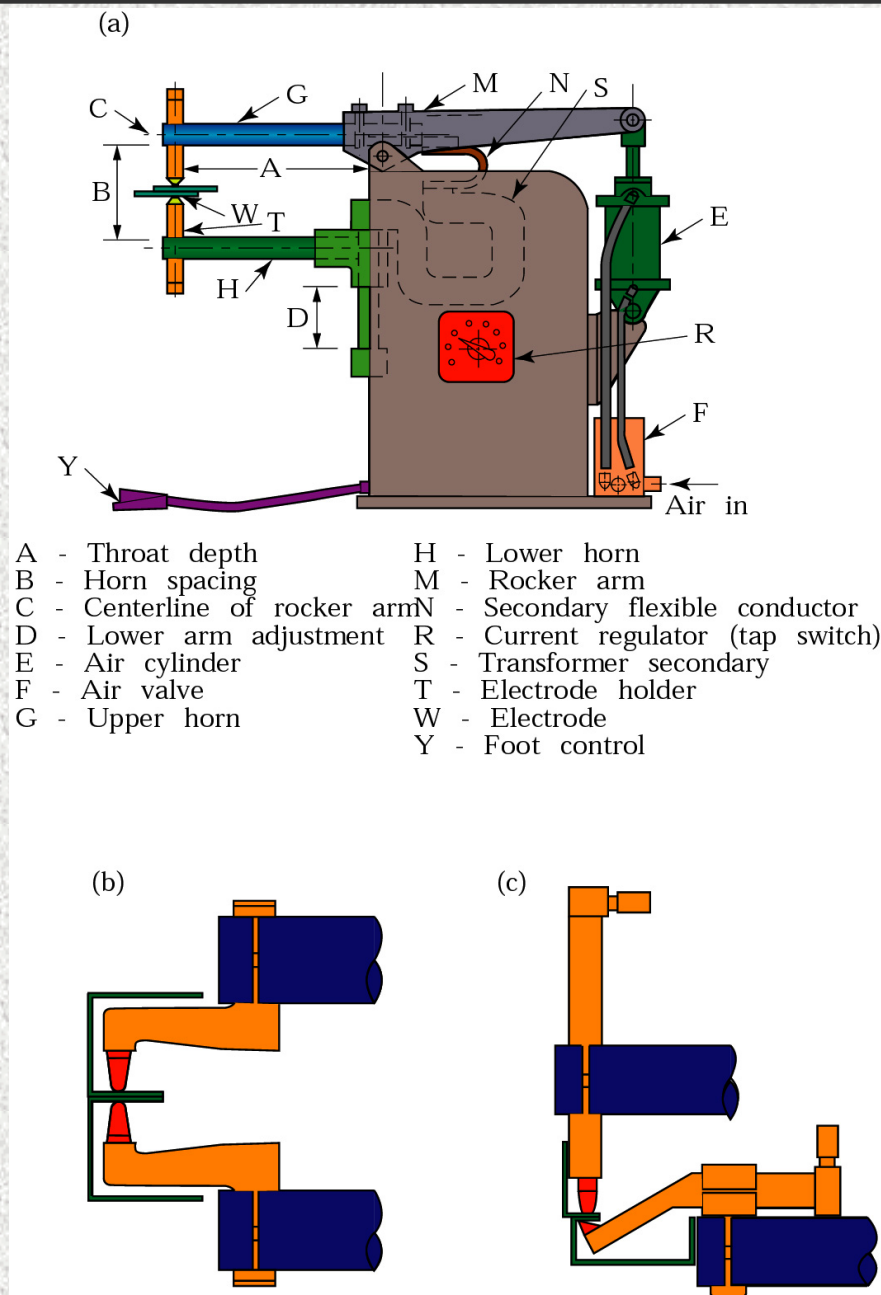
(a) Schematic illustration of an air-operated rocker-arm spot-welding machine. *Source:* American Welding Society. (b) and (c) Electrode designs for easy access into components to be welded.
